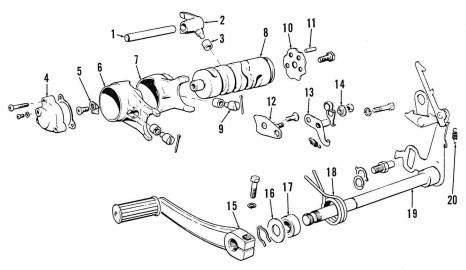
Shifter assembly used on AC 50 model. Other units are similar.
